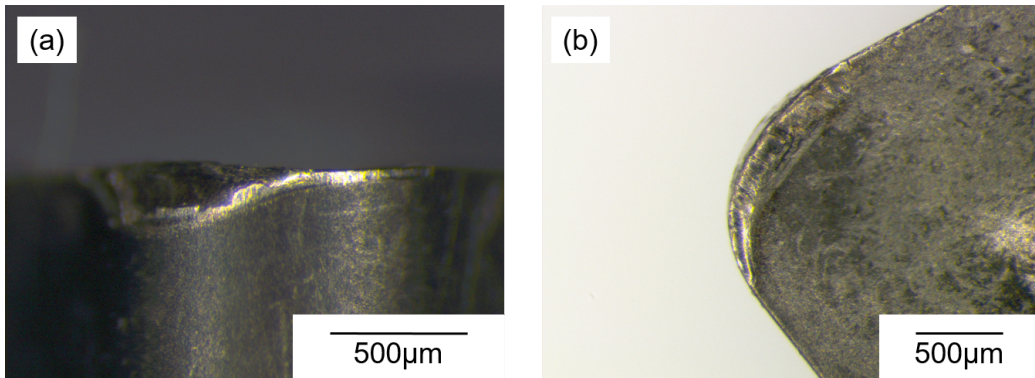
Microscope images showing the degree of tool wear after trial 2.2.3 on billet 3.2. Showing (a) the flank face and (b) the rake face.
